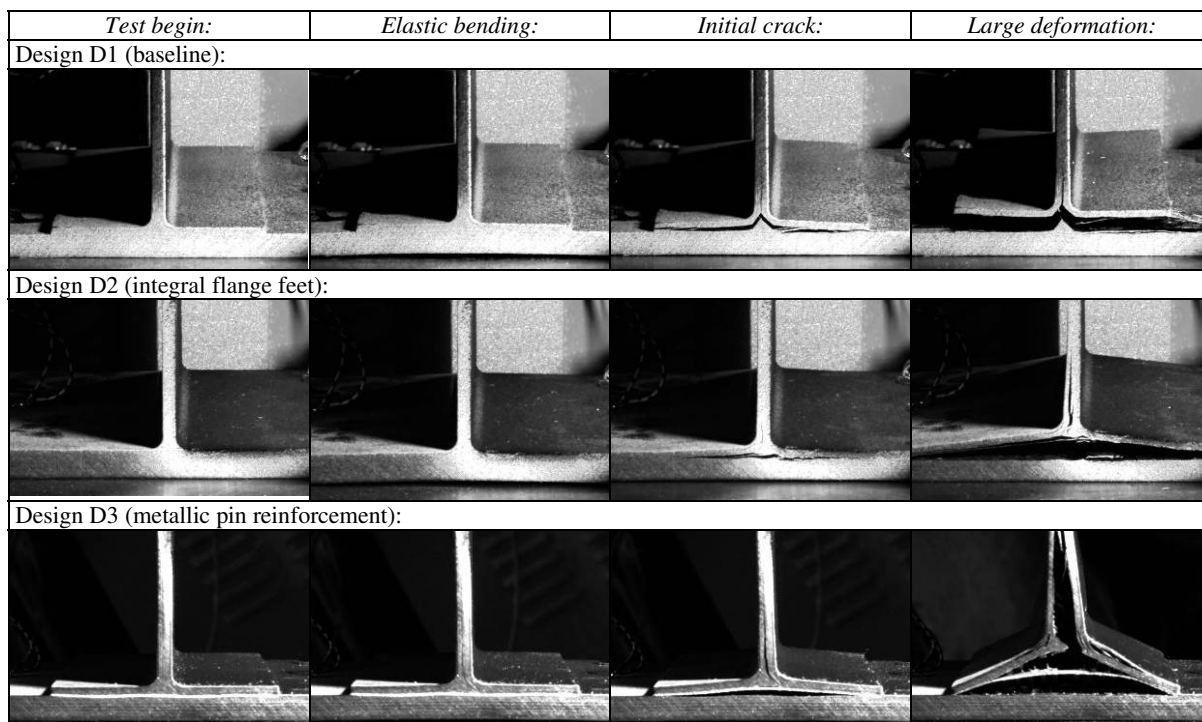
Deformation and failure sequence of all three T-joint designs under quasi-static loading
